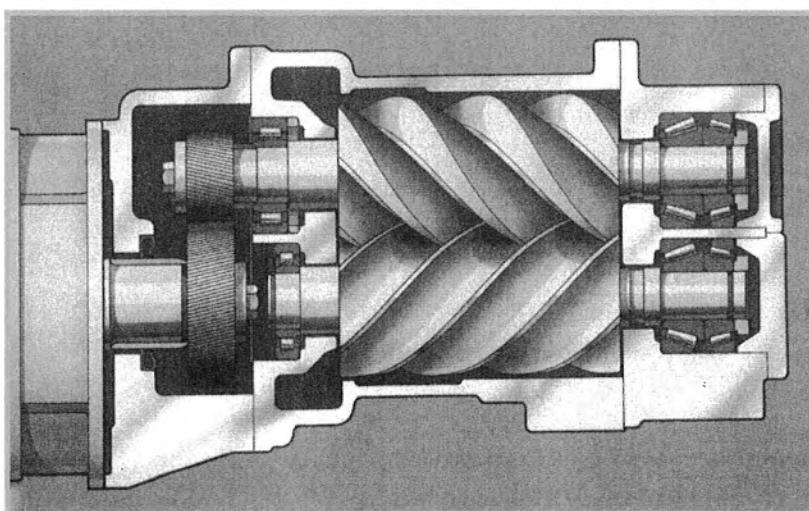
Screw type compressor. Helical rotors on parallel shafts meshes air between rotors to compress and increase air pressure.
